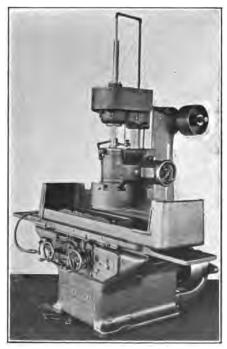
Surface grinding machine with vertical spindle. (Courtesy Pratt & Whitney Co.)
